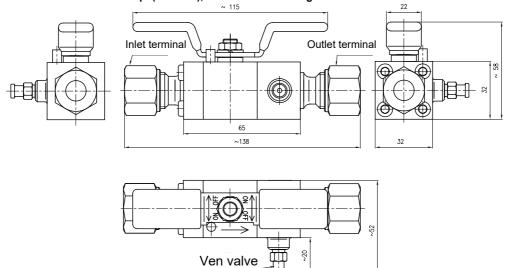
Ball valve - manometric test (971 51 ..), dimensional drawing
